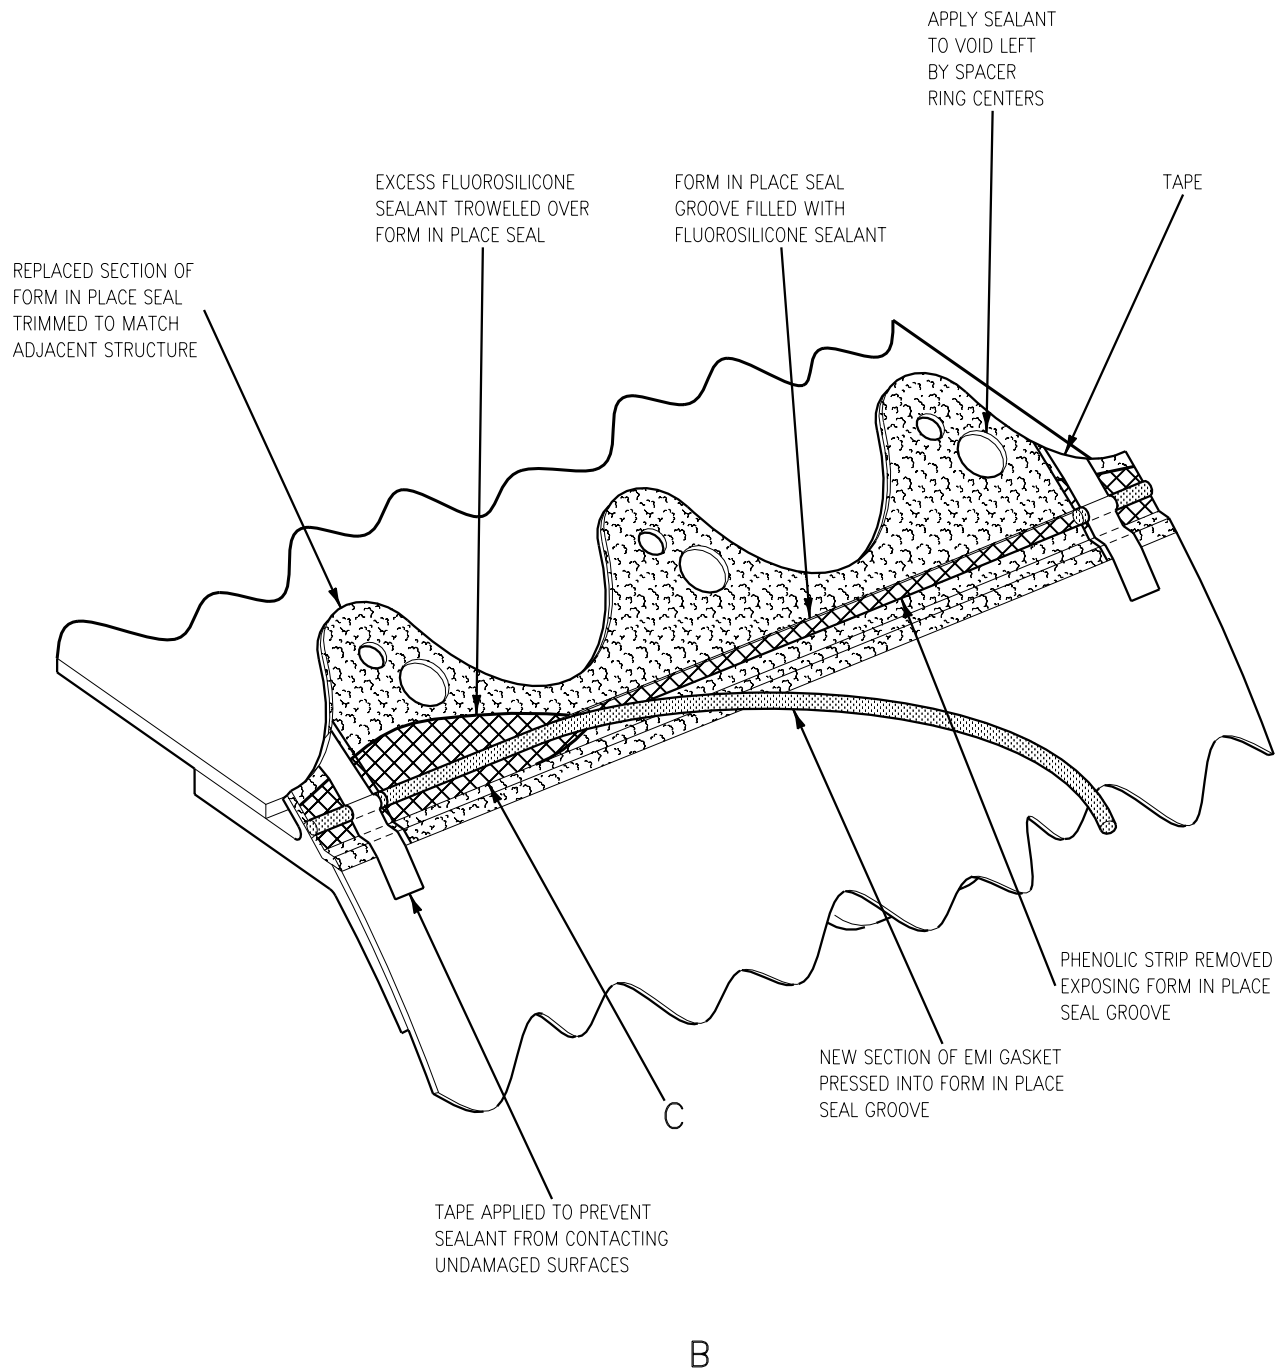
Form In Place Seal Damage More Than 0.80 Inch (Sheet 3)
